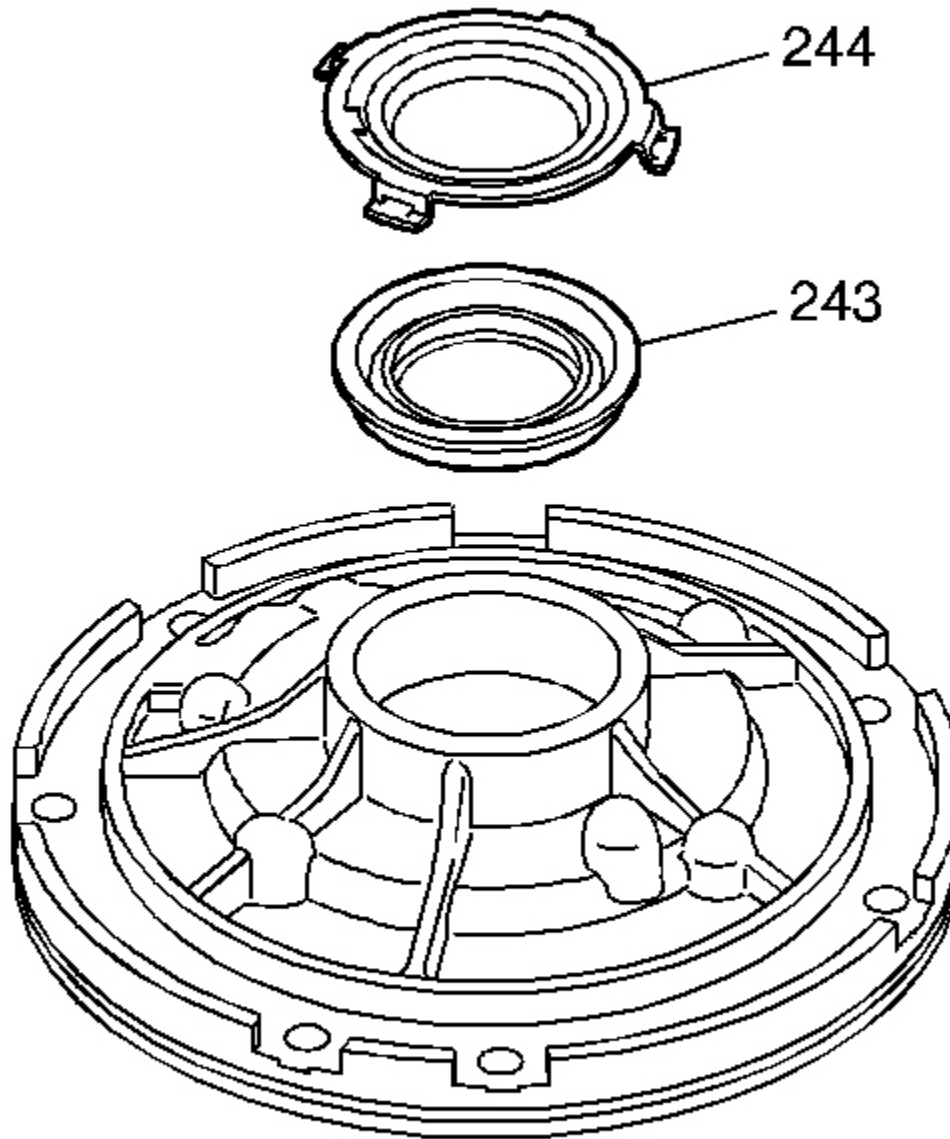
Locating Front Helix Retainer & Oil Seal Assembly
